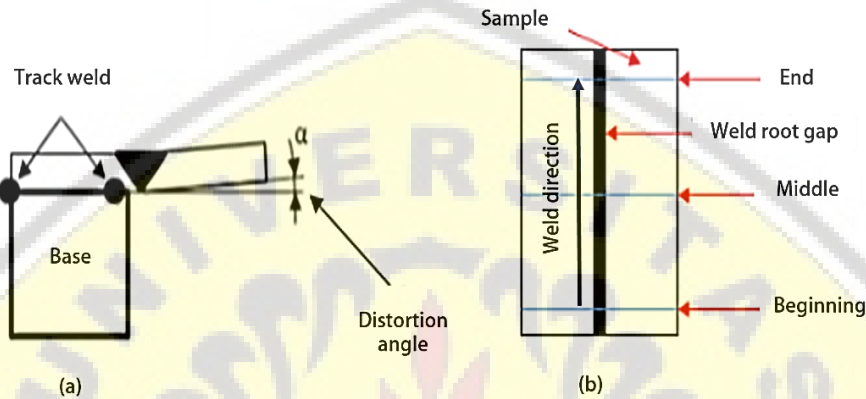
Distortion measurement utilizing (a) angular shrinkage measurement at (b) 3 test locations perpendicular with the weld direction of the sample.
